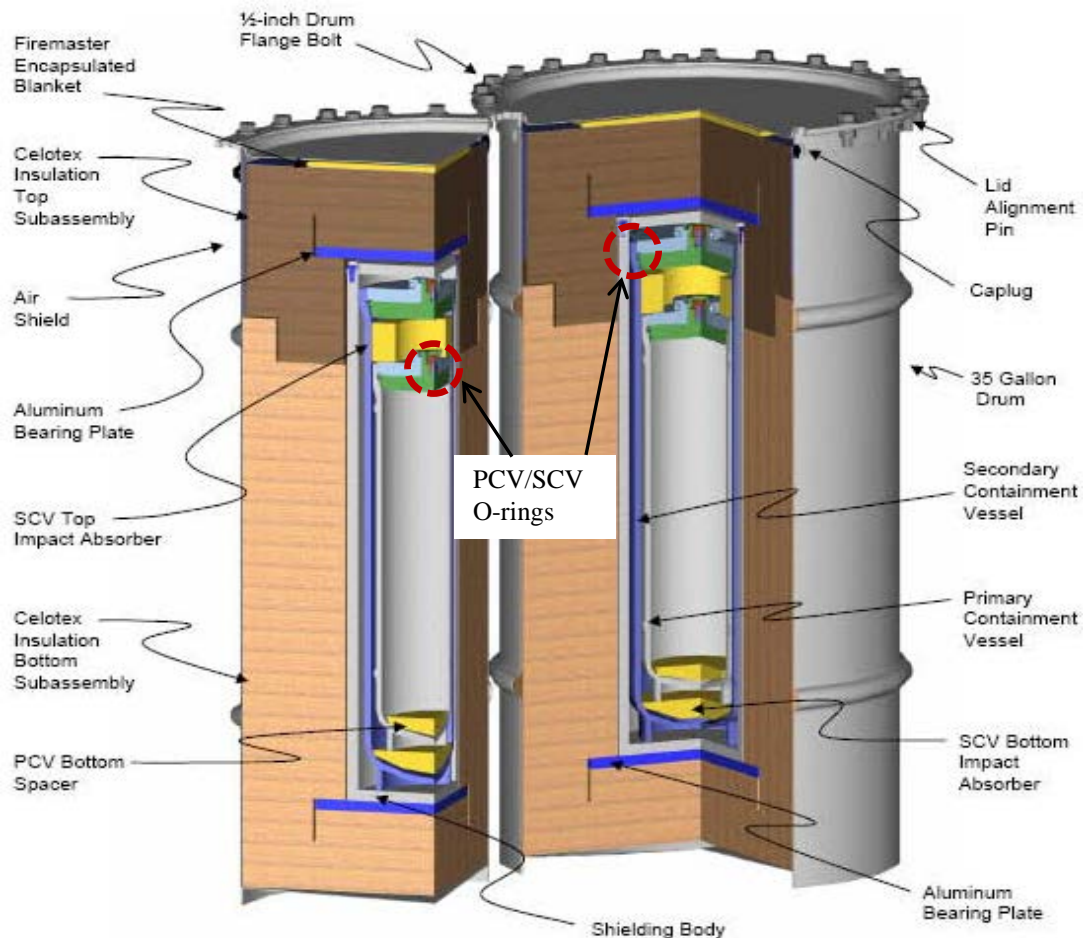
9975 Shipping Package 3-Dimensional Section View
